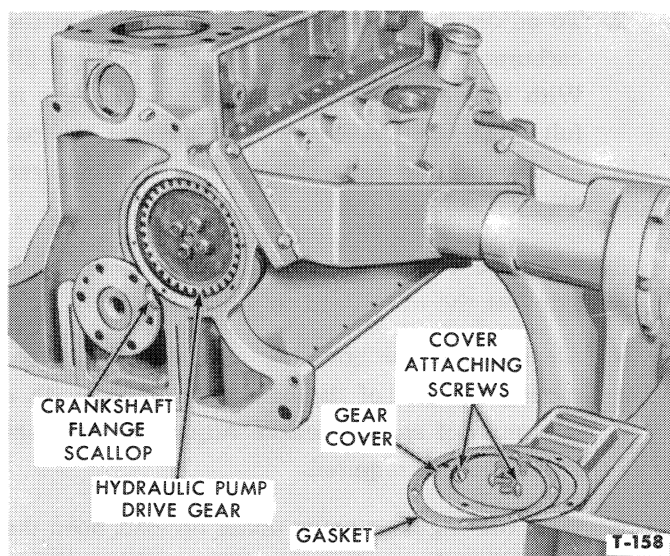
Hydraulic Pump Drive Gear and Related Parts
